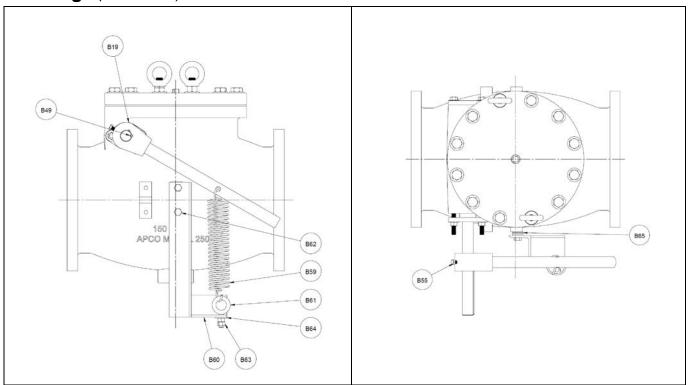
585 Series Swing Check Valve (Spring Loaded Lever)
